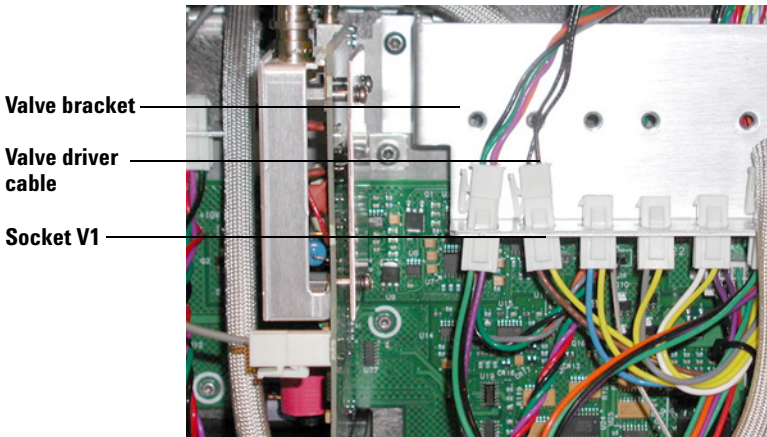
Mount valve and connect driver cable (6890N GC shown)
